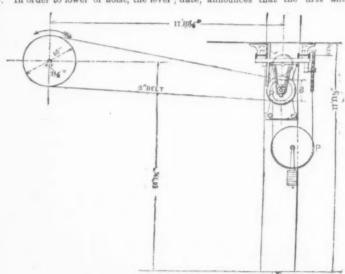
End View of Driving Gear on End of Shop, Showing Tightening Pulley, or Take-up
